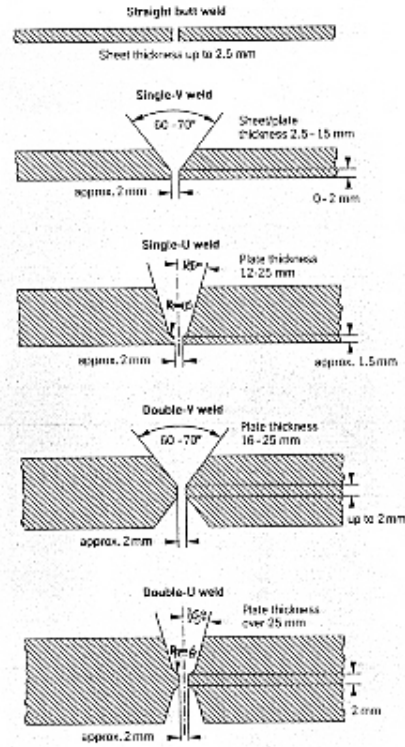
Edge preparation for welding of nickel alloys and special stainless steels.
